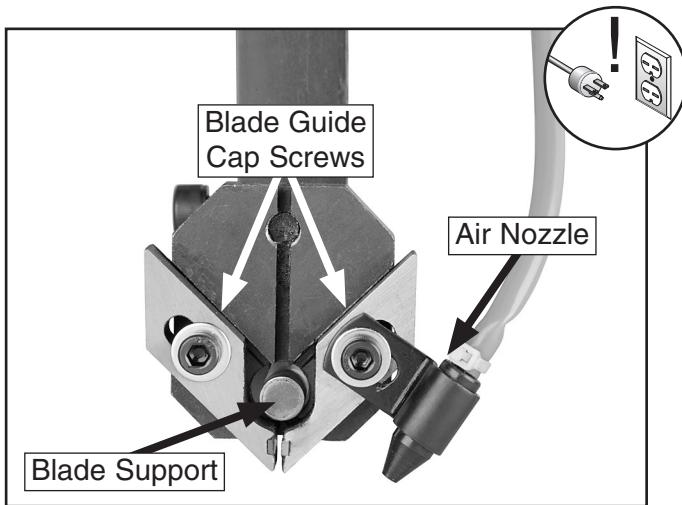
Blade guide assembly (upper assembly shown without blade for clarity).
